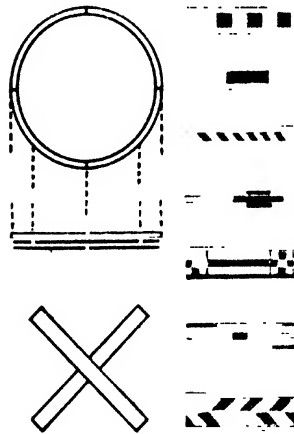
Plan and elevation of rim and various mosaic stringings.
